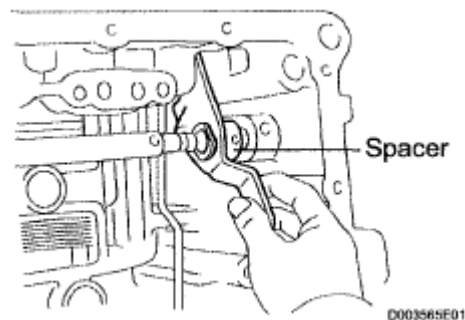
Installing Manual Valve Lever Sub-Assembly
